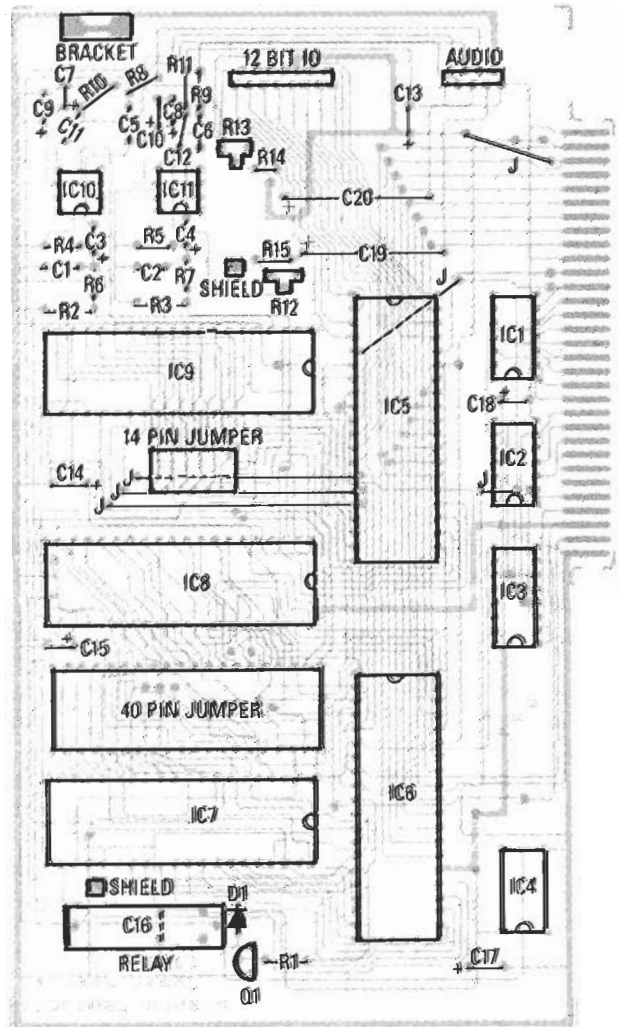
MOUNT ALL COMPONENTS as shown here, being careful in the audio section, where close component mounting could lead to shorts.
